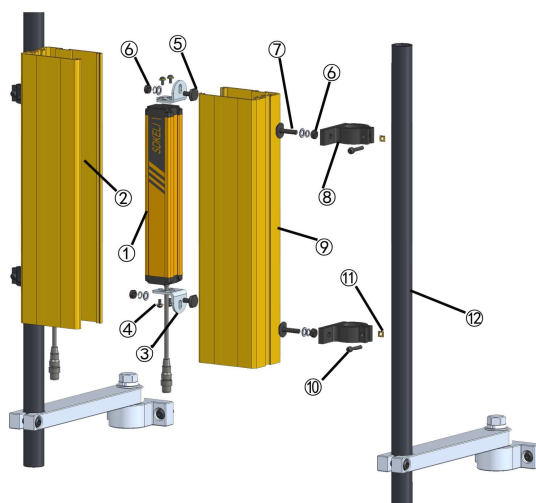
Scatter shield pipe mounting diagram(GF)
